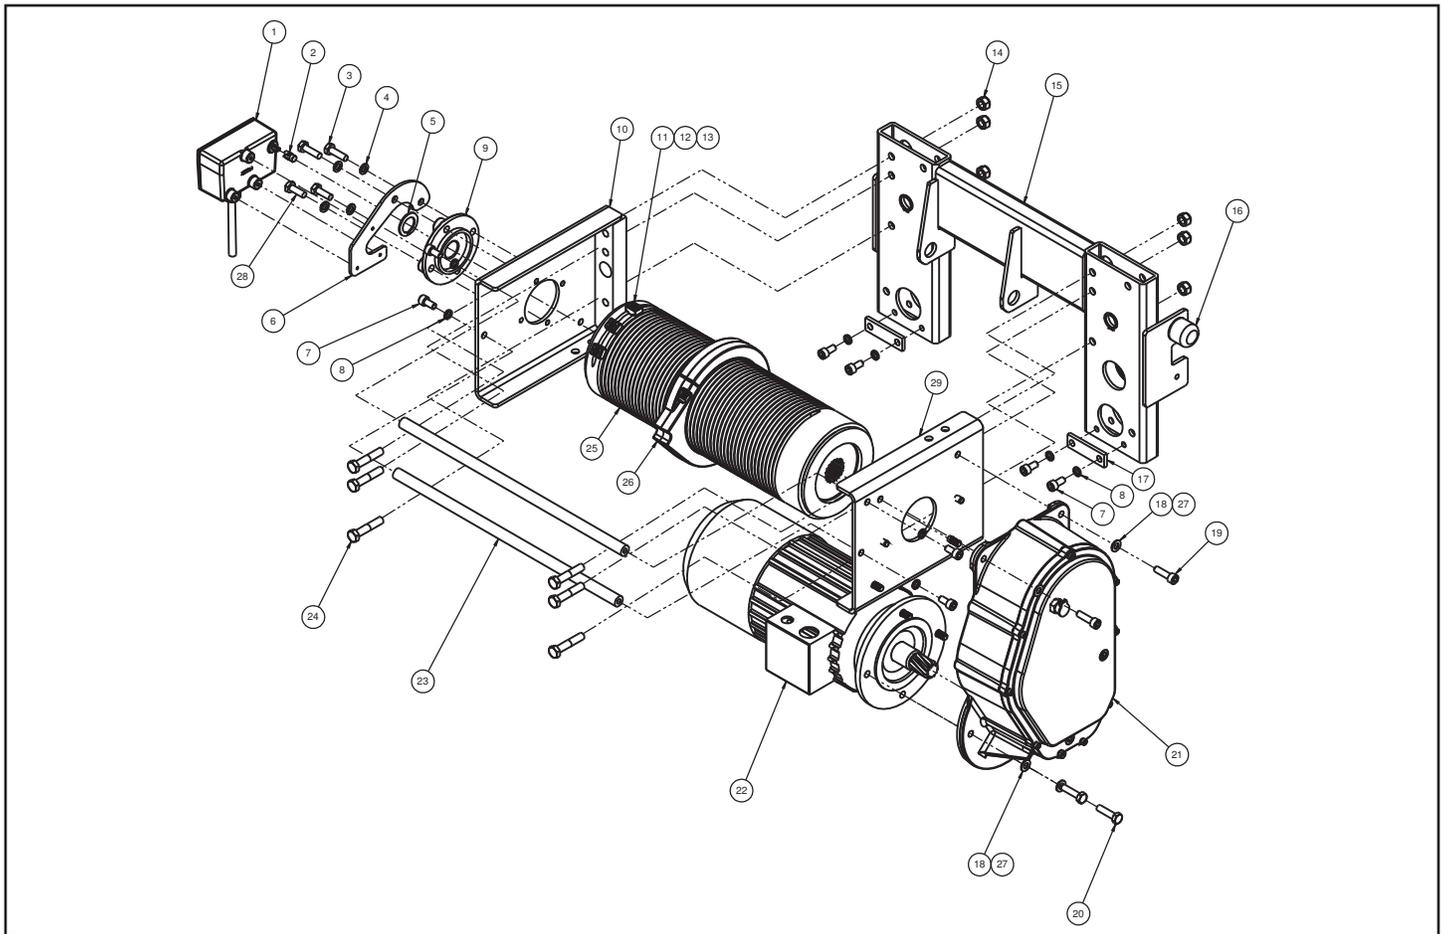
Hoist Drum, Drum Frame, Gearcase, Motor, Rope Guide and Screw Type Limit Switch
